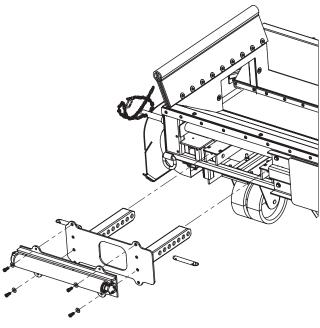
Adjustable-Height Push Rollers with Push Roller and Pins Removed
